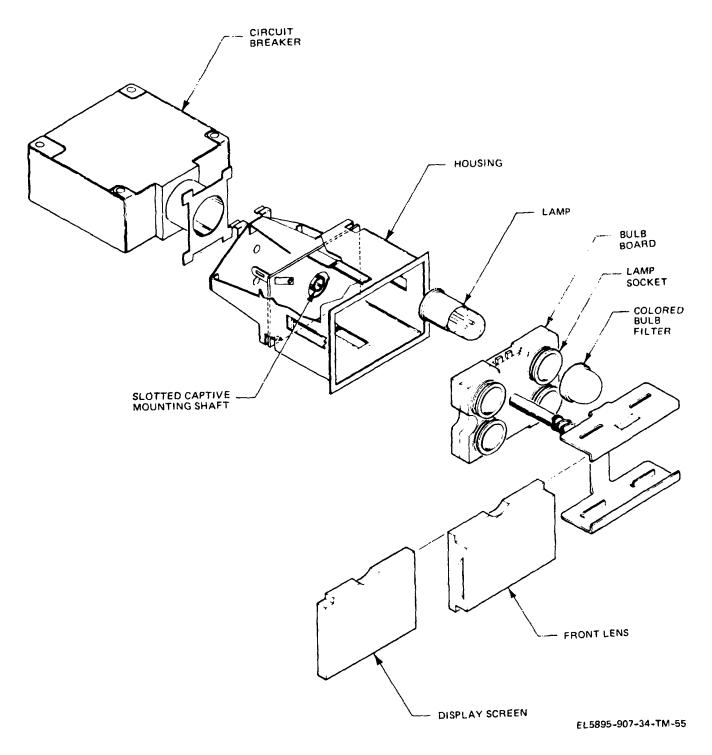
Circuit breaker indicator lamp assembly, exploded view.
